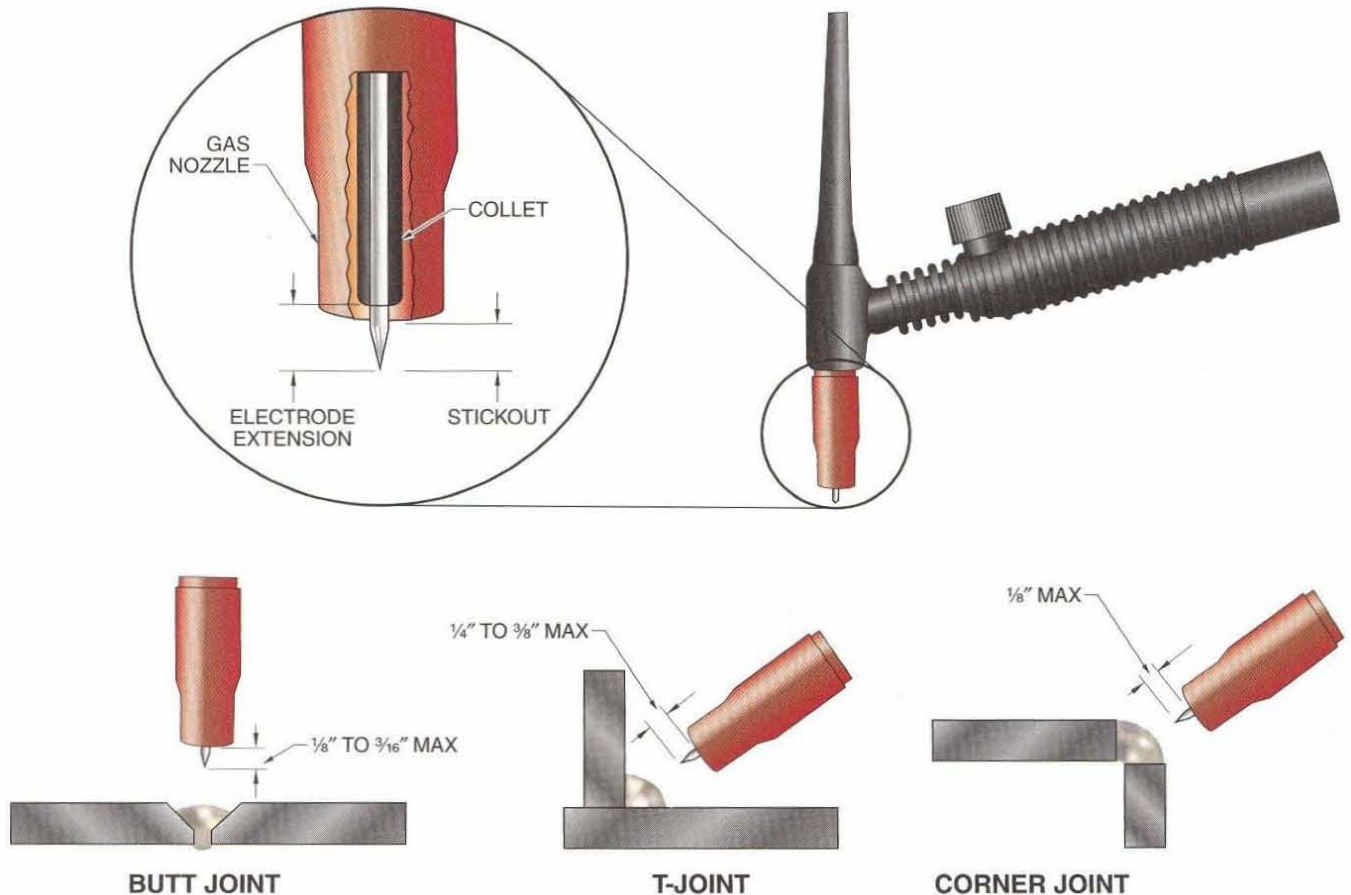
Adjust the electrode extension to ensure the proper stickout for the particular joint being welded.
